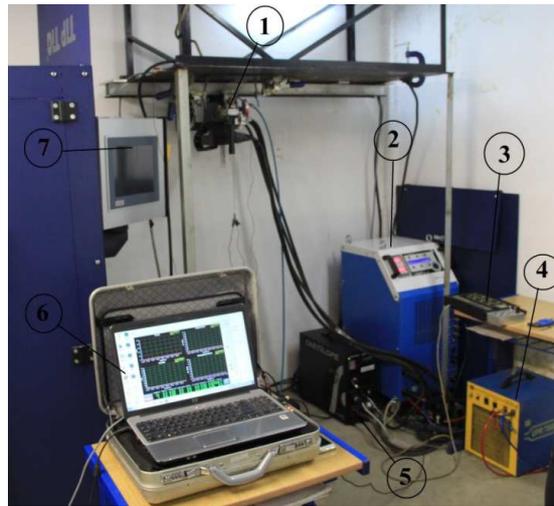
Equipment used in tests: 1) Welding bug Tartflope V4; 2) Welding power source; 3) Welding bug interface; 4) Refrigeration center; 5) Welding bug CPU; 6) Data acquisition system; 7) TIP TIG interface.
